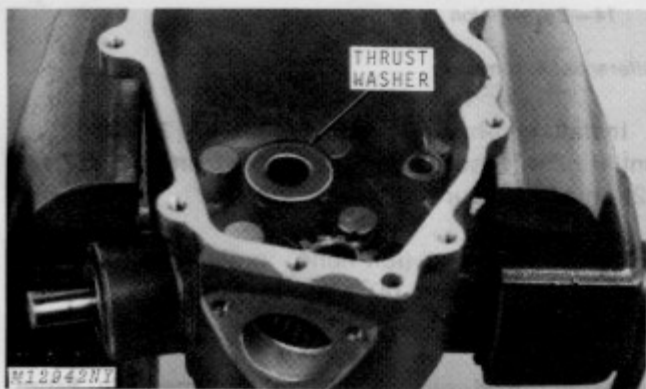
Installing 3-Gear Cluster Thrust Washer
